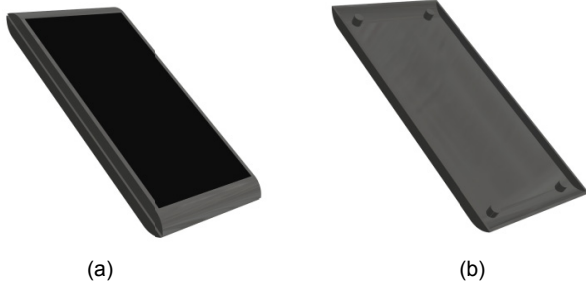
Mobile phone model, (a) assembled and (b) back part.
